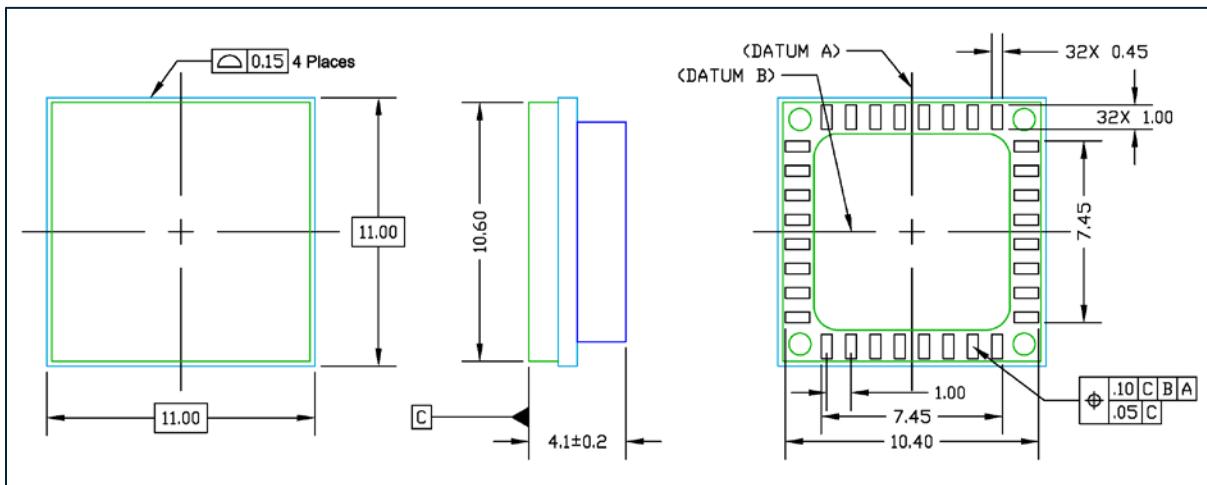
SE868 Family (low profile) Mechanical Drawing
